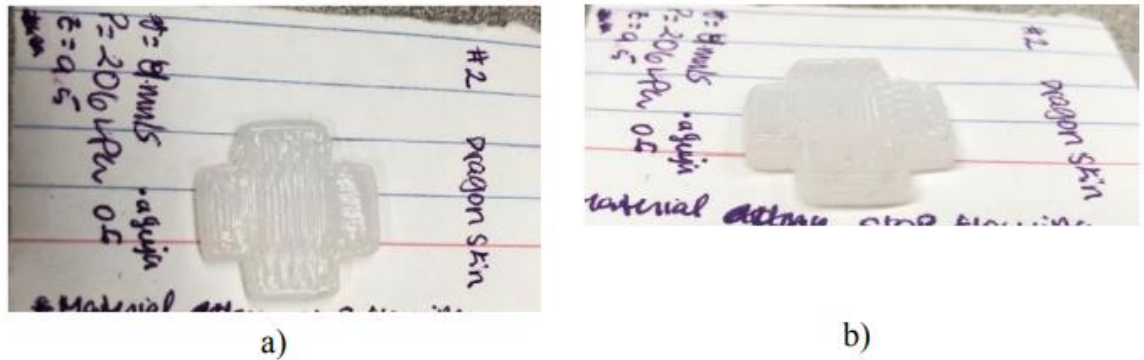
Cross using a 20G syringe with a printing time of 15 minutes and printing speed of 4 mm/s a) Top view b) Side view
